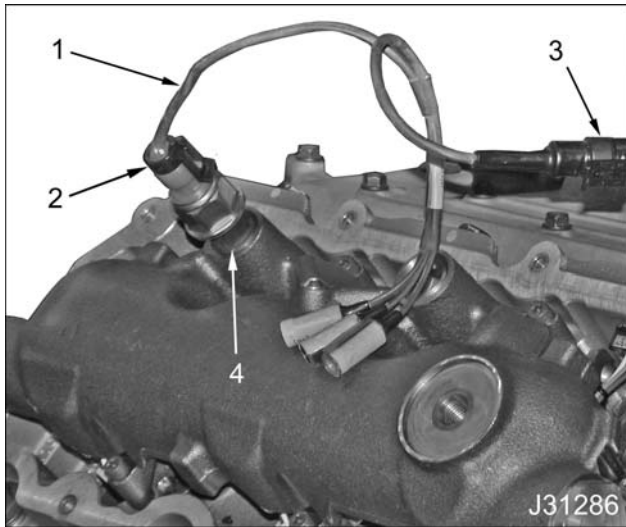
ICP sensor with ICP Sensor Adapter (right cylinder head)
